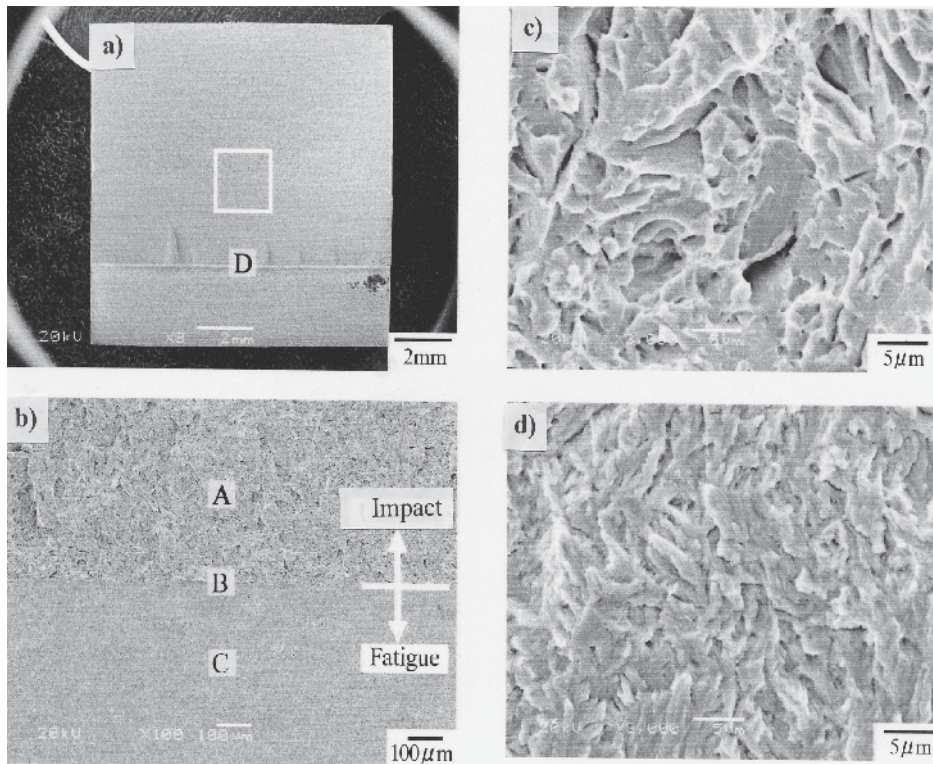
Impact fracture surface. SKD61, HRC 52, 2.5mm saw cut with fatigue crack[3]. a) Macroscopic fracture surface, b) Enlargement of the window area in a), c) Impact fracture surface (A in c)), Fatigue fracture surface(C in c))
